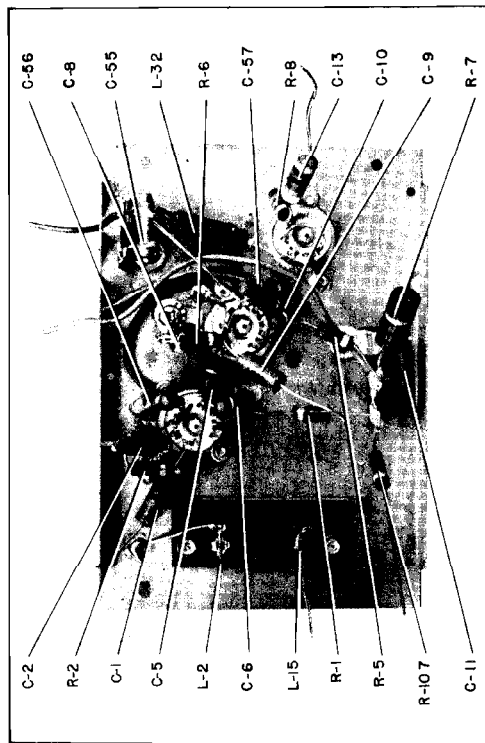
Bottom View of R.F. Unit (switch assembly removed)
